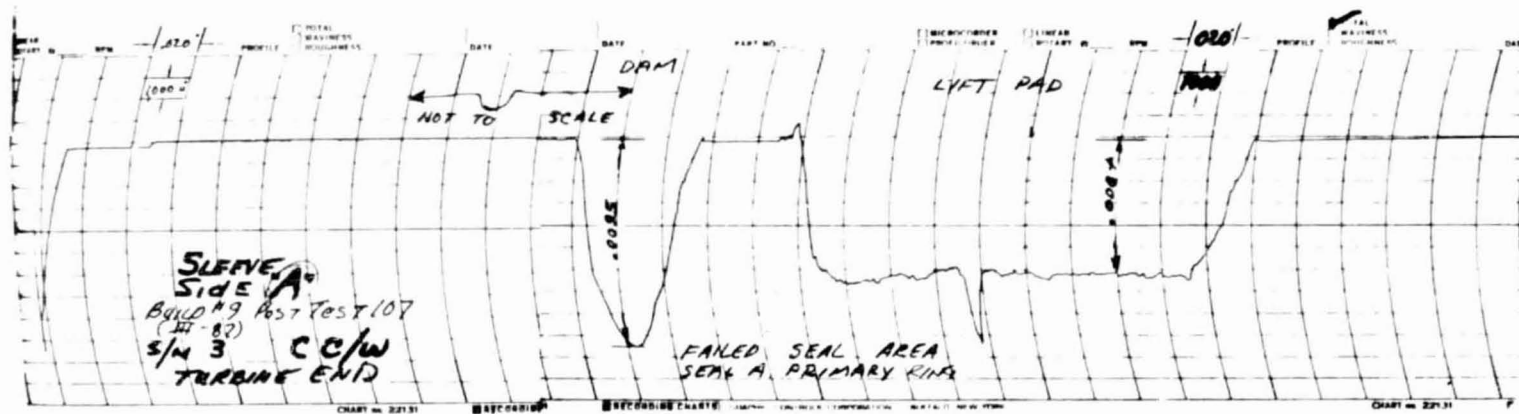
Surface Profile Trace of Tester Mating Ring Sleeve Turbine End, P/N RS005092X-005, S/N 3, Build 9, Posttest 107
